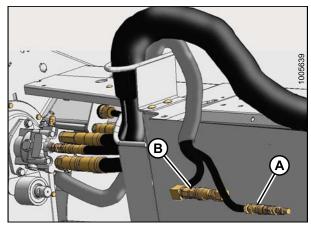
Auger/Reel Pressure and Auger/Reel Return Hose Couplers – 14-Ft. and 16-Ft. Header Shown (18-Ft. Similar)
